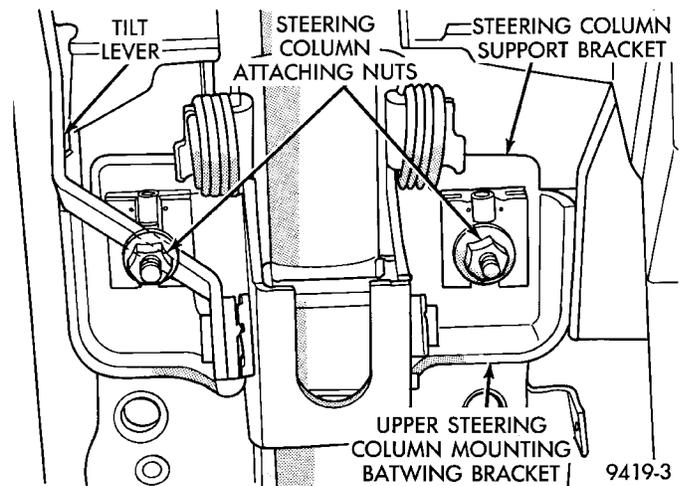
Steering Column Upper Support Bracket Attaching Nuts
